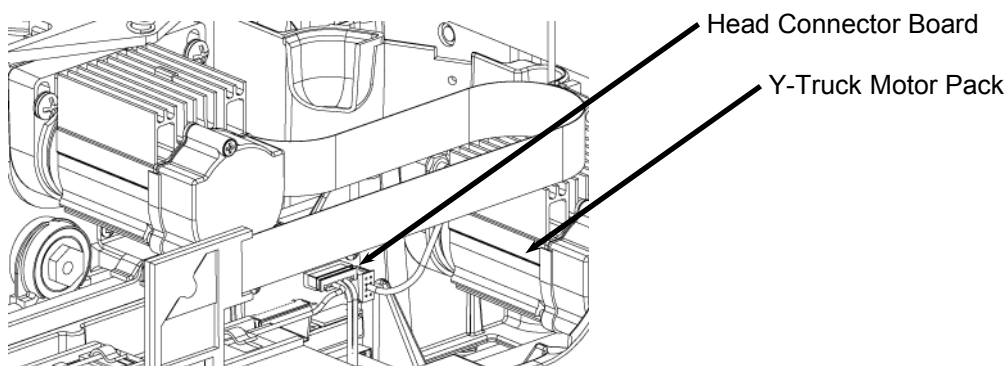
LOCATING THE HEAD CONNECTOR BOARD
